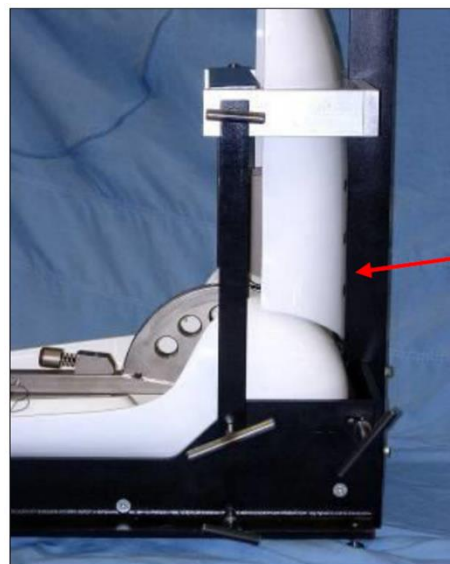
H-PM installed into the jig without HRMD assembly. A check should be made to ensure that the gap between the H-PM back pan and jig vertical support is no more than 4mm.
